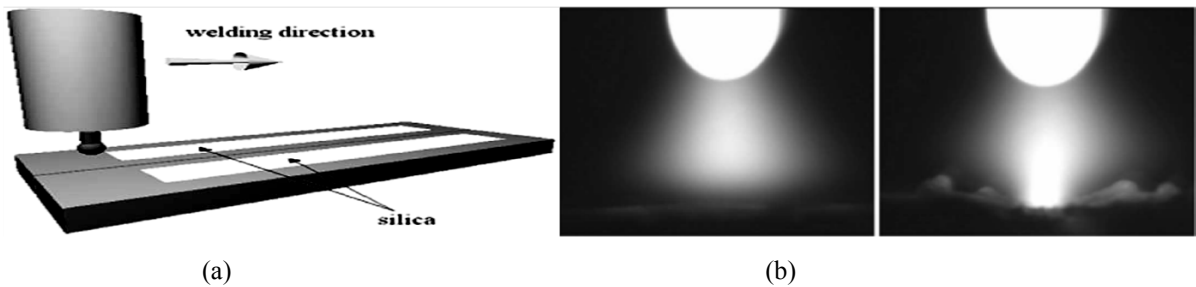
(a) Show the schematic diagram of FBTIG welding; (b) Arc flow of (Left Side) TIG and (Right Side) FBTIG Welding process.
